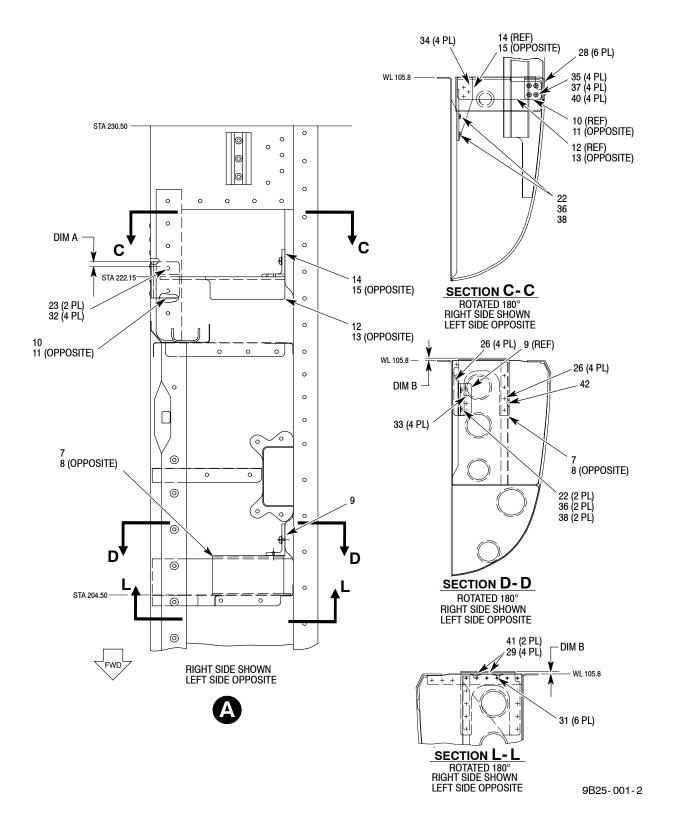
Modification of the 900 Configuration Tub Assembly (Sheet 2 of 3)
